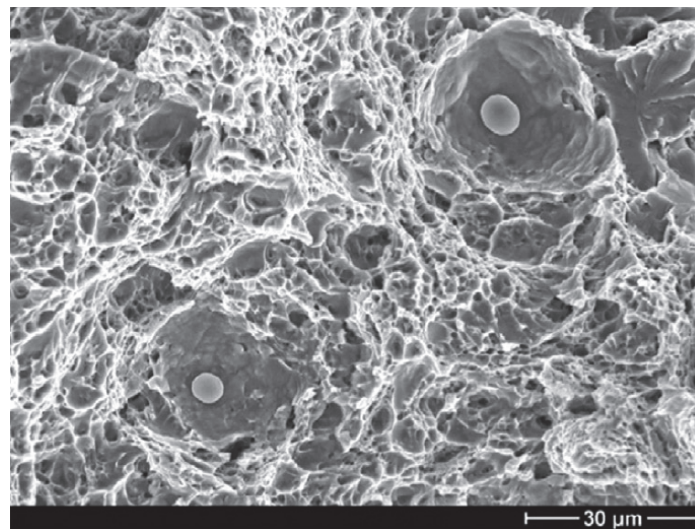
Fracture surface - 22NiMoCr3-7 [48]
